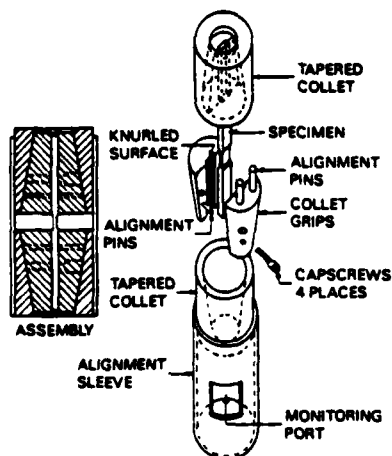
ASTM D-3410(Celanese) Compression Test Fixture Using Conical Wedges
